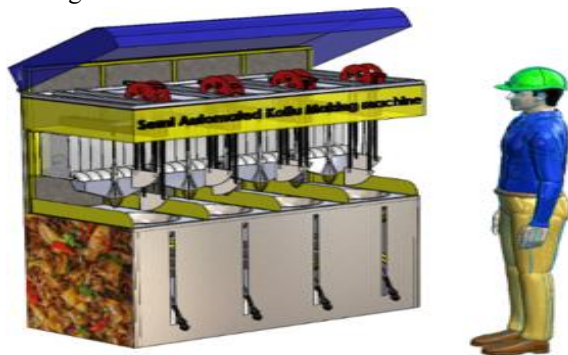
3D Design of Semi-Automated Kottu Making Machine
